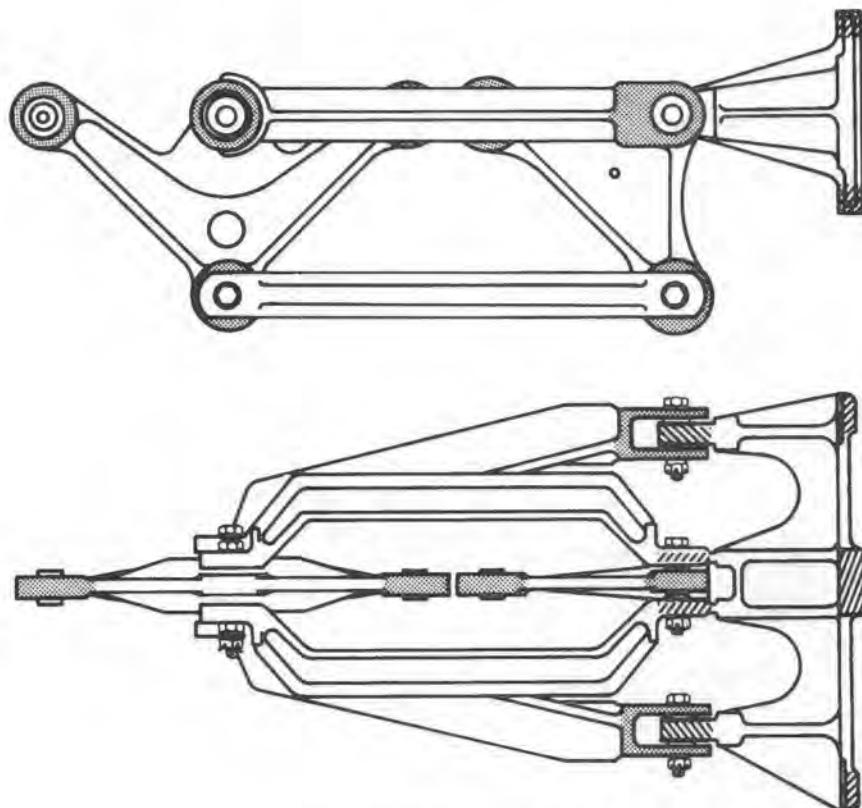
Mixing lever assembly — cyclic controls — removal and installation
